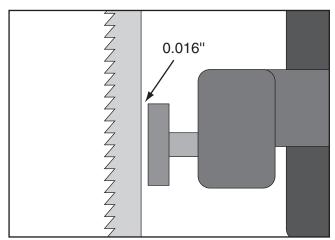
Blade should be aligned approximately 0.016" away from the bearing edge.
